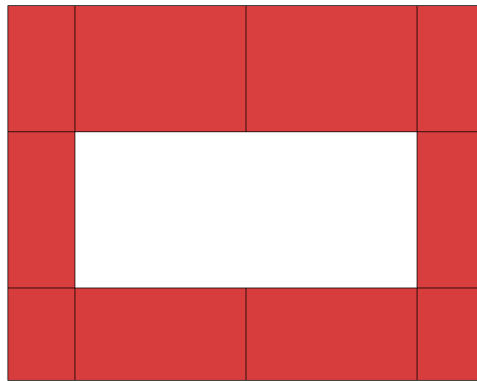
Surface layout diagram for generating the solid clamp frame structure.
